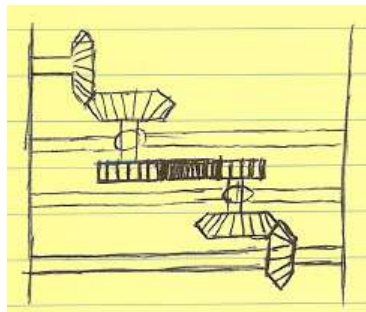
The illustration shows the front and top view of Concept 3, which uses a series of helical gears.
